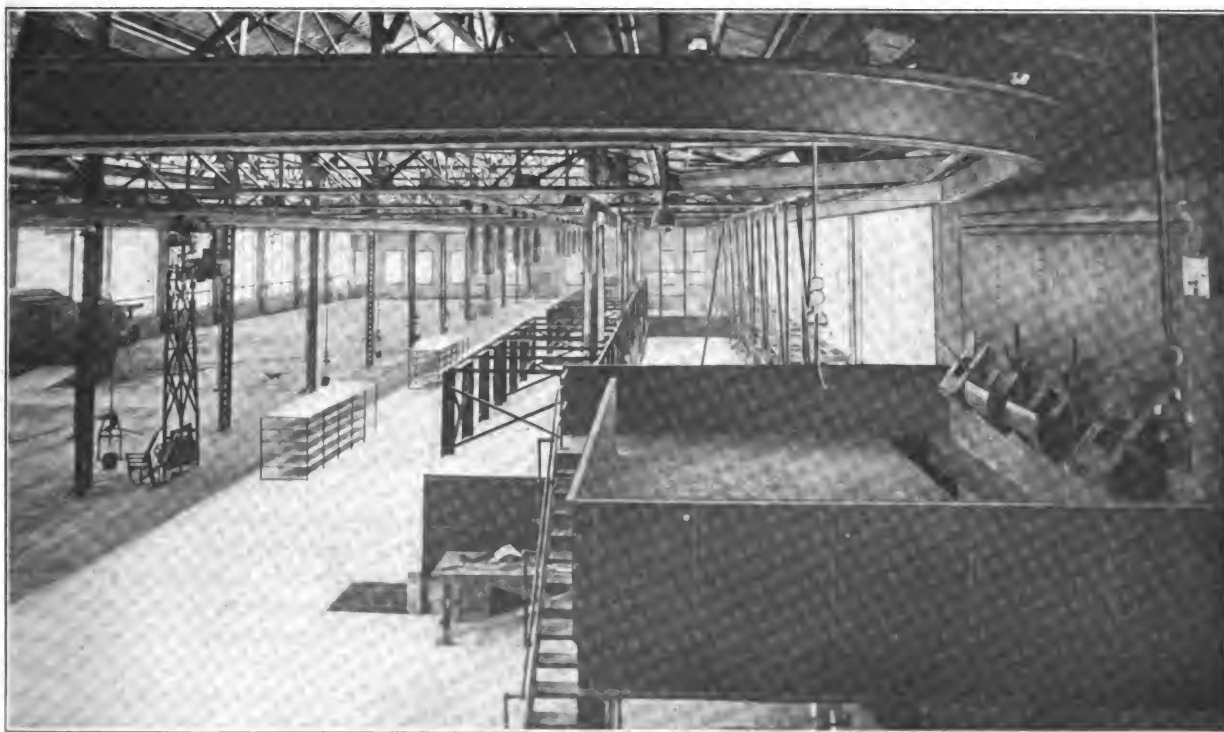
West end of the foundry looking from the charging floor of the cupola. In the foreground are shown the sand spouts and mixing platform.
